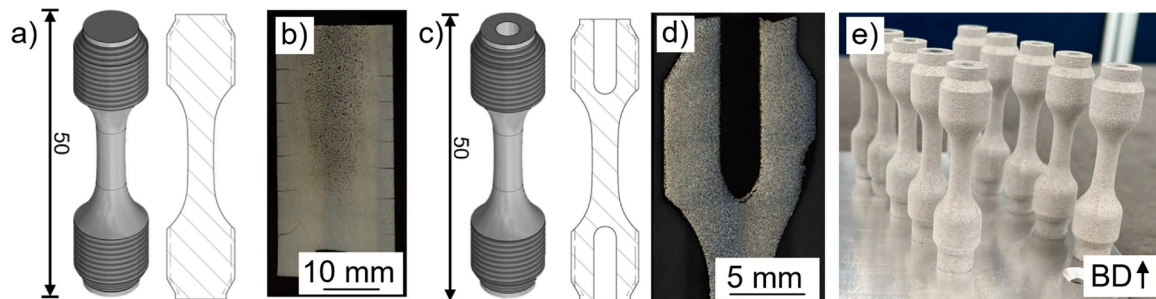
Initial specimen geometry for tensile and fatigue investigations (a) with subsequent crack and pore containing cross-sections (b), adopted specimen geometry with blind holes at front sides (c) with subsequent nearly crack free and negligible pore containing microstructure (d), additively manufactured WE43 alloy specimens on the build platform (e), BD: build direction.
